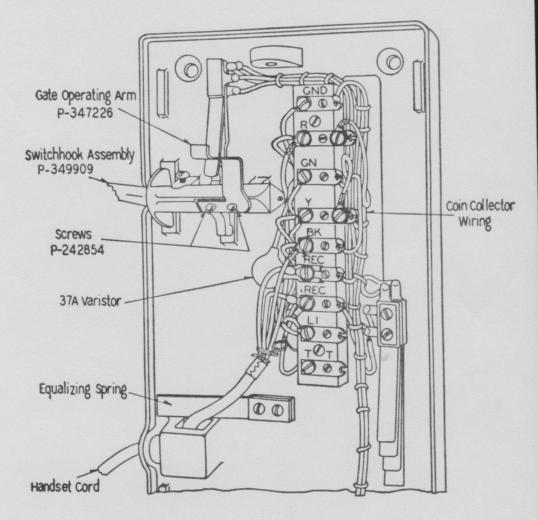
and 174 Type Coin Collectors-Backplate Assembly
